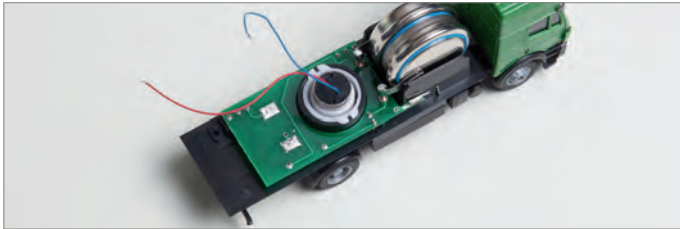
Truck model with universal circuit board, soldered batteries, without wiring
